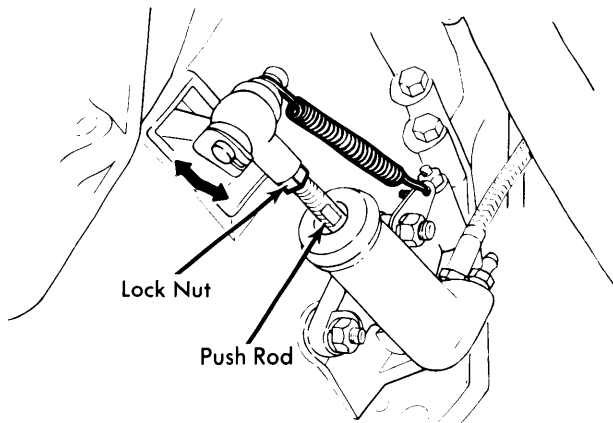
Clutch Slave Cylinder Push Rod Adjustment
